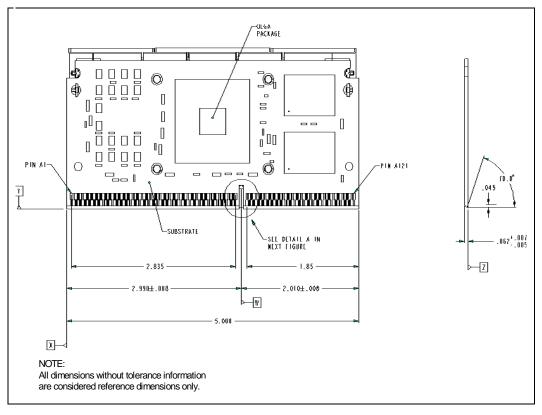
S.E.C.C.2 Packaged Processor Substrate — Edge Finger Contact Dimensions
